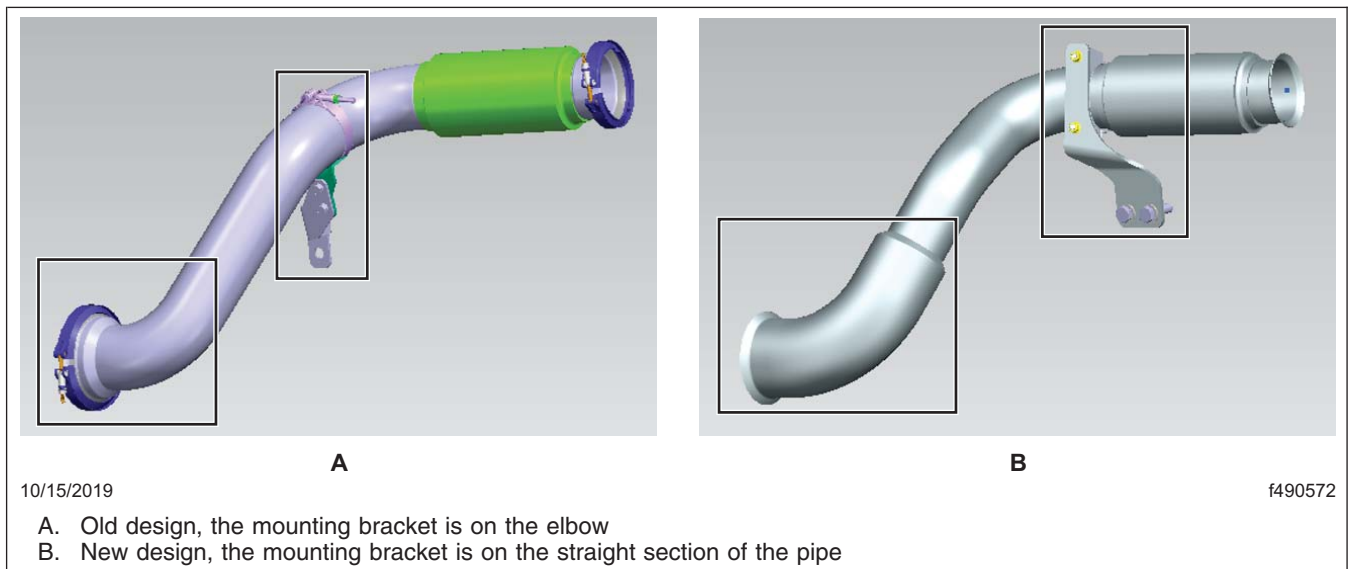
, Difference in the Shape of the Tube and Bracket Mounting Location
